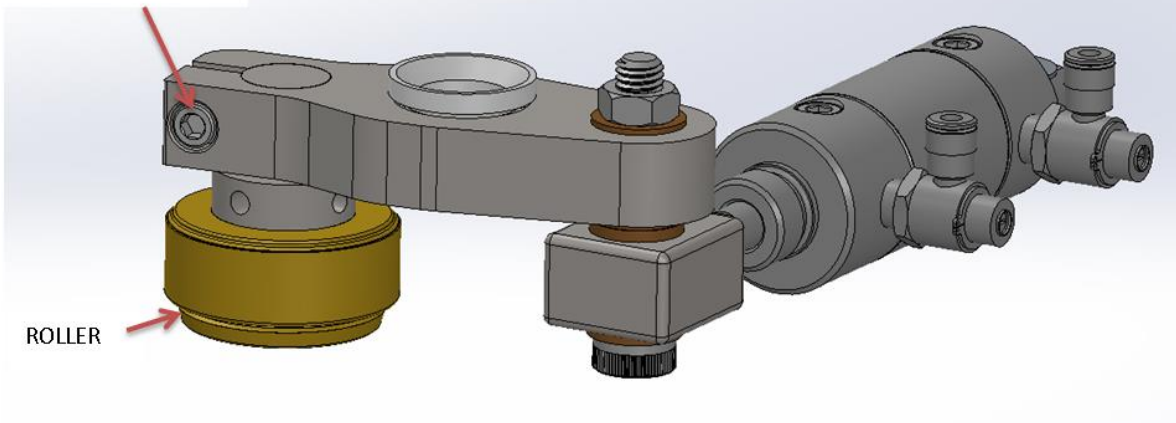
Roller Assembly. Roller height can be adjusted by loosening the socket head cap screw and turning the roller assembly in or out. The roller's position can be fixed by tightening the socket head cap screw to 70 inch/lbs.
